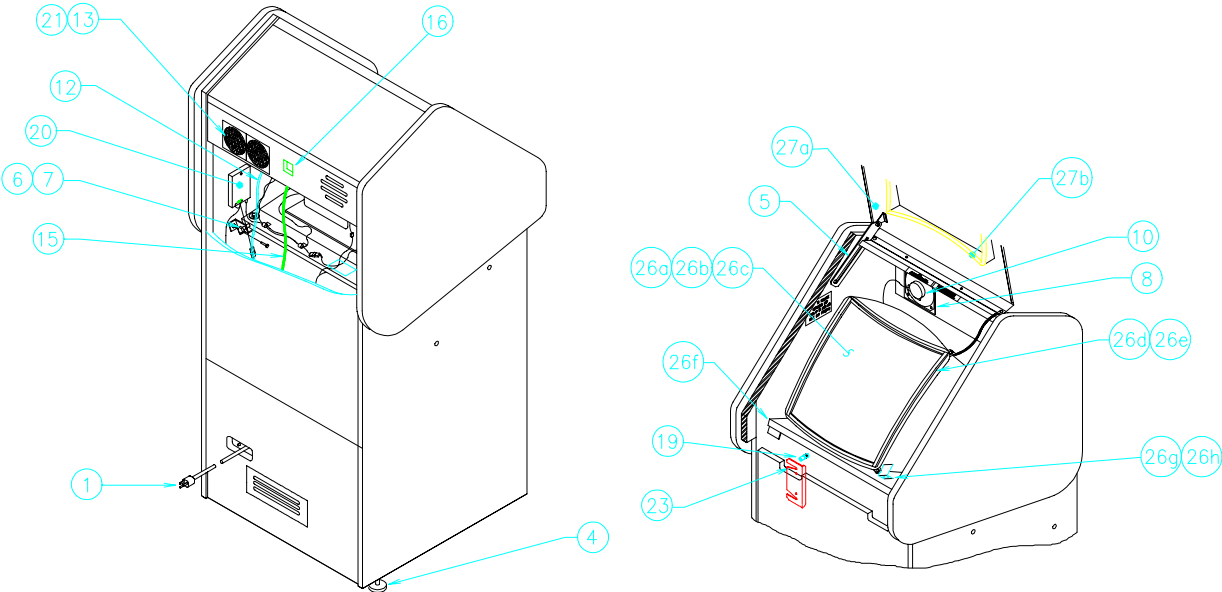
19" UPRIGHT (REAR VIEW)
